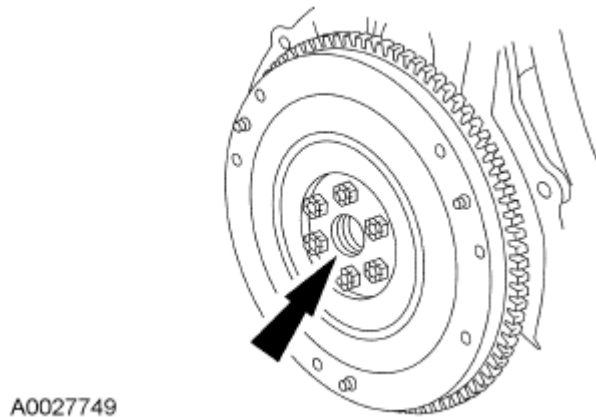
Locating Transmission Input Shaft Pilot Bearing
